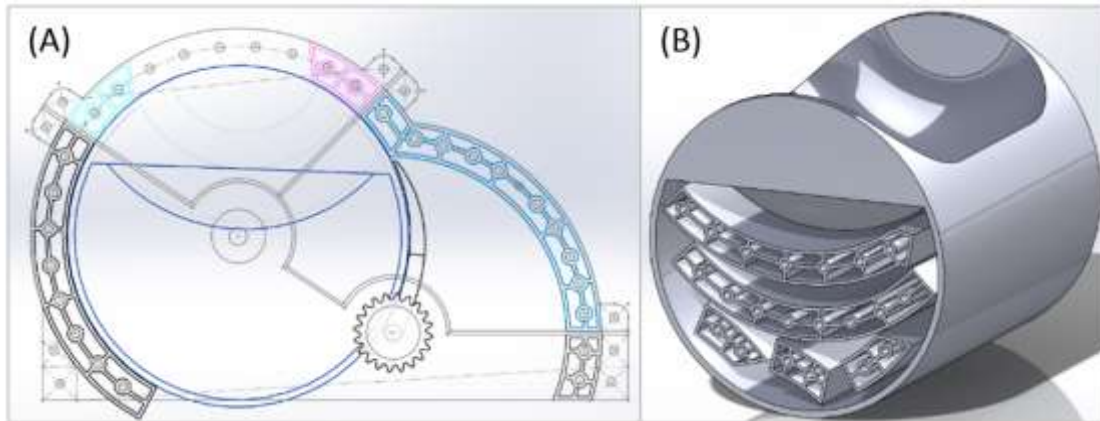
CAD models of P1. (A) 2D CAD design of prototype. (B) 3D CAD model of prototype for printing SLS printing with ‘nested’ internally to reduce printing volume and cost. (Tierney, R. 2017)
